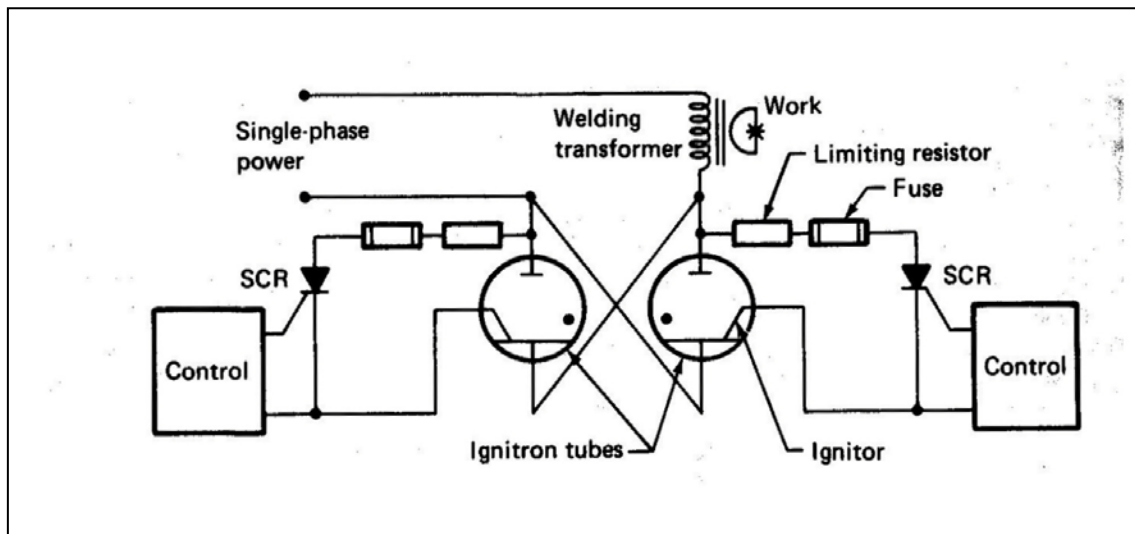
Electronic heat control circuit of AC single-phase machine
